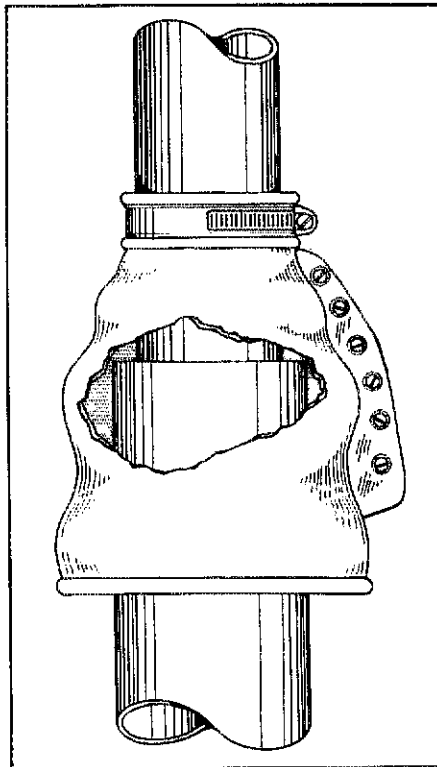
KB6FNP suggests a Volkswagen transaxle boot to cover and protect a rotator thrust bearing.
